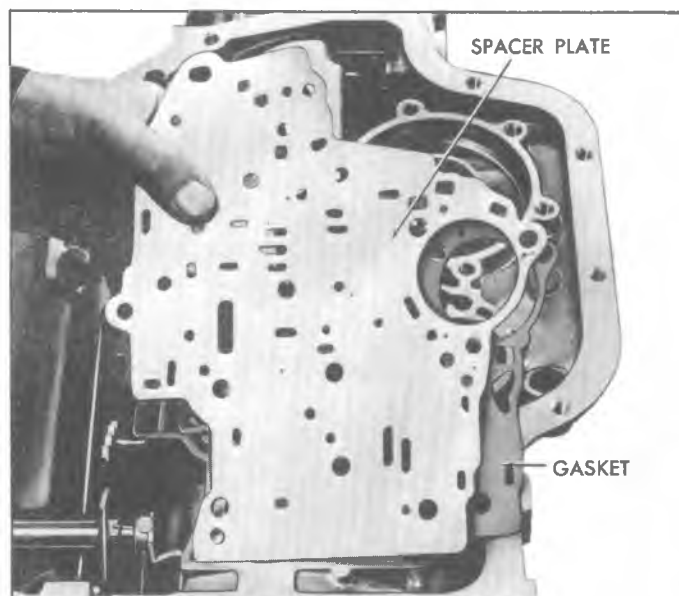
T—Installing Control Valve Assembly Spacer Plate and Gasket
